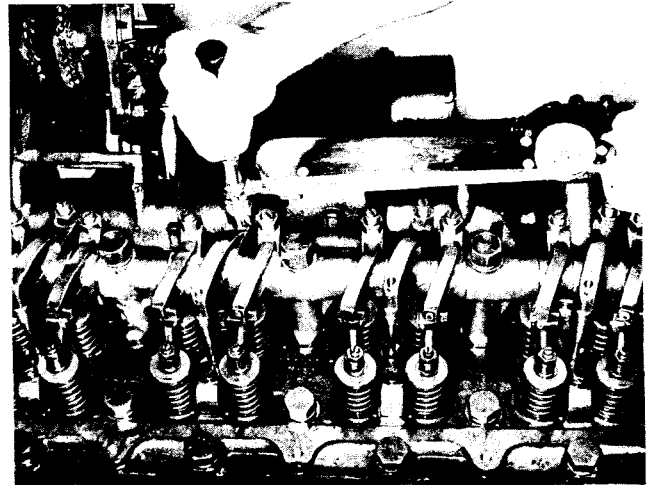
(V51489) Tightening injector adjusting screw locknut
